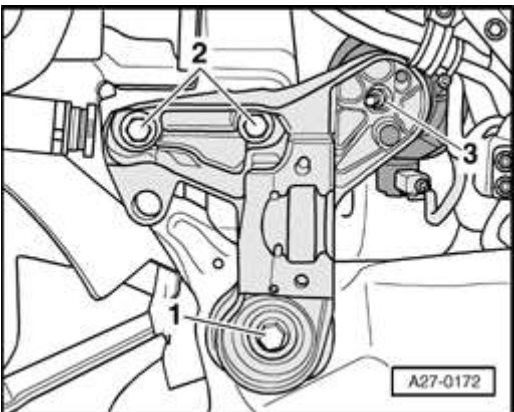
Identifying Nuts, Bolts, And Right Side Engine Mount Carrier
